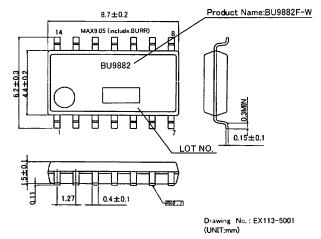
(b) PHYSICAL DIMENSION SOP14 (BU9882F-W)
